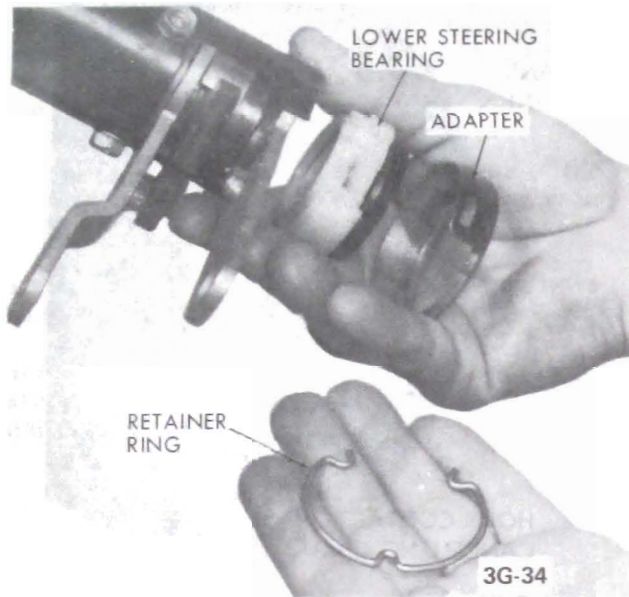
G-54 - Installing Lower Steering Column Bearing - Manual Transmission
